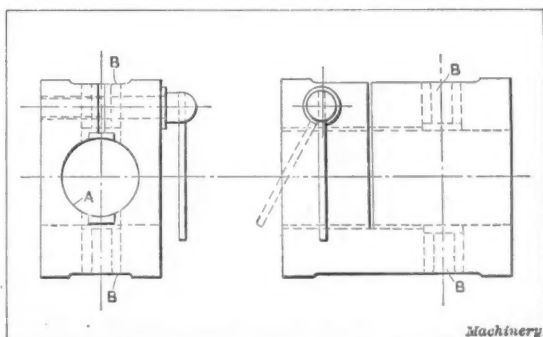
Block Jig Illustrating Application of Angle-plate in Fig. 1
